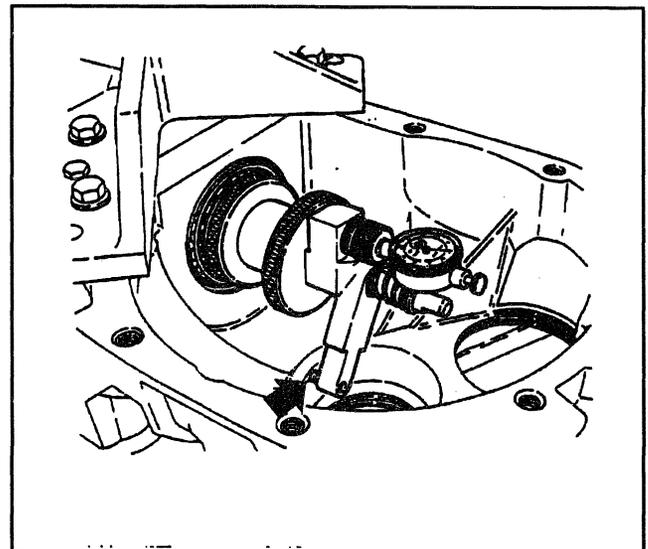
Measuring Pinion Depth-Button Located in Bearing Bore
